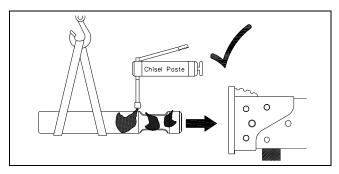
Pre-Lube Tool Shank Before Installing
